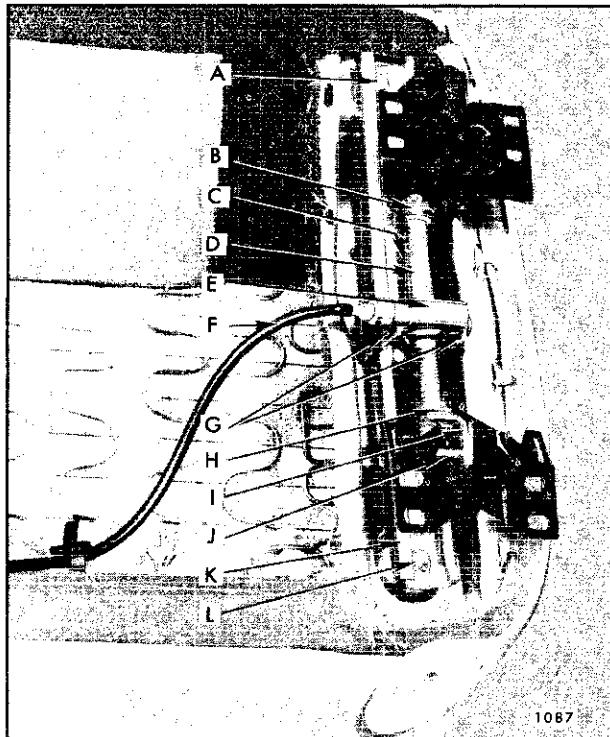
Horizontal Power Adjuster - "C & E" Styles
